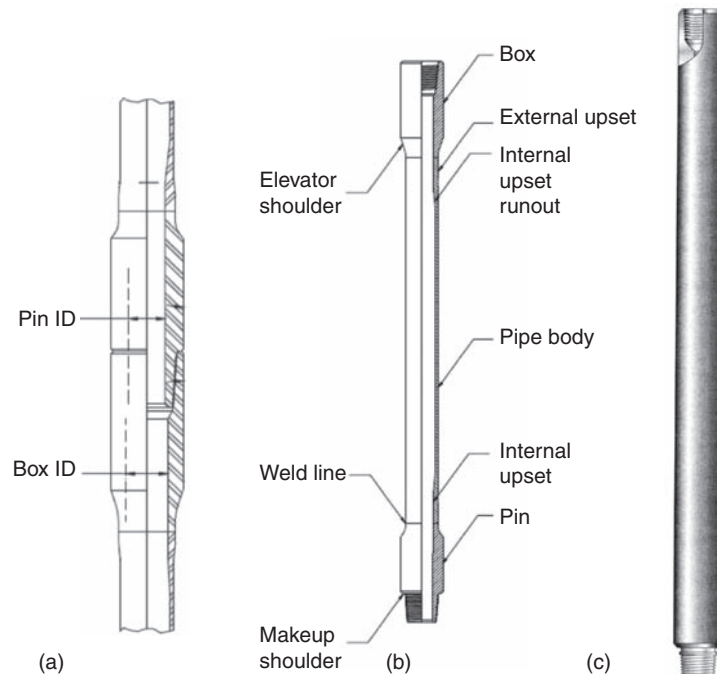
(a) Drillpipe tool joint; (b) drillpipe; (c) drill collar. Parts (a) and (b) are from Aadnoy et al. (2009).
